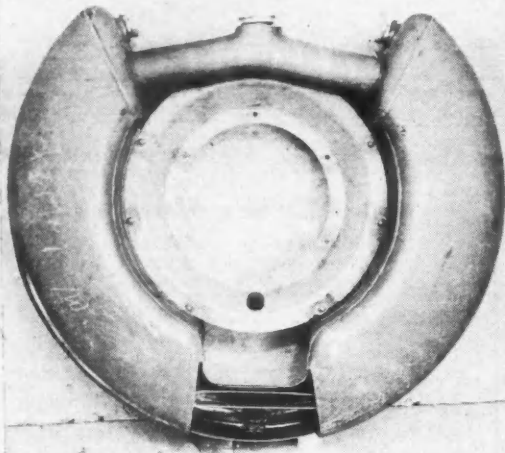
Oil tank cut away at the bottom to show the fishtail-shaped outlet
